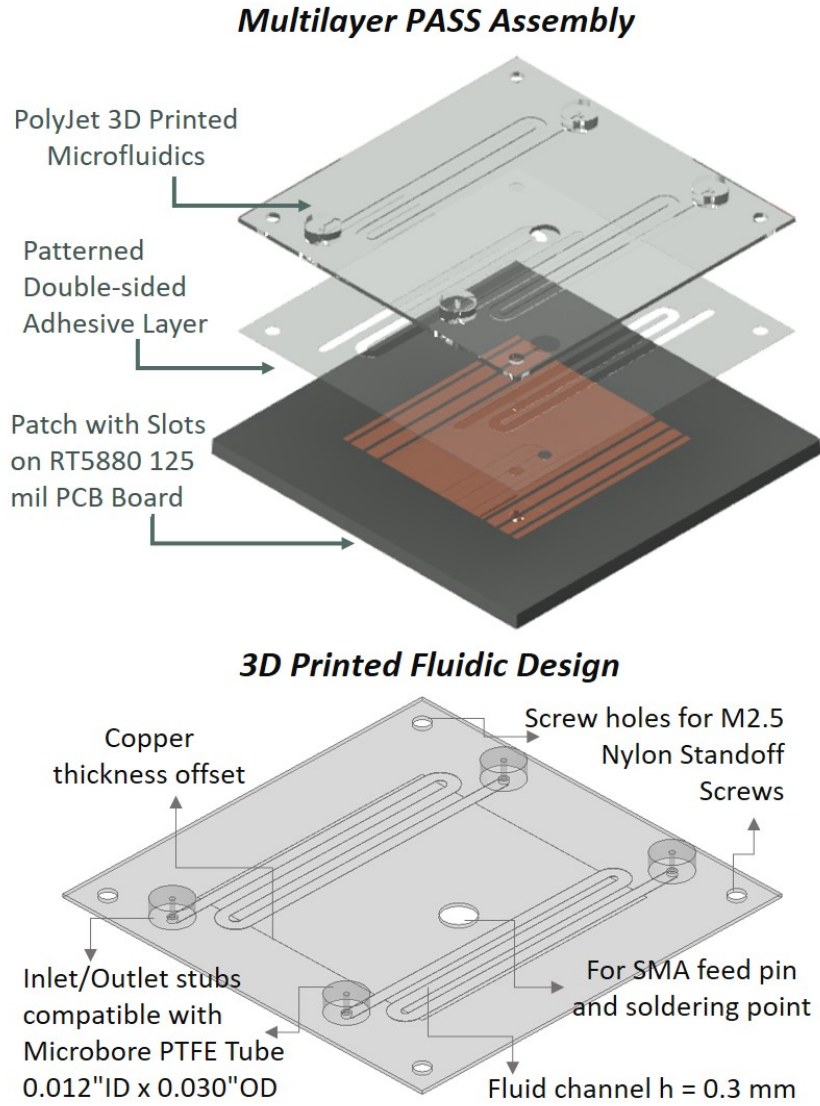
The multilayer prototype assembly and microfluidic design. The prototyped wide-band frequency reconfigurable PASS is assembled by attaching a 3D printed microfluidics to the patch antenna on PCB substrate via a patterned double-sided adhesive layer.
